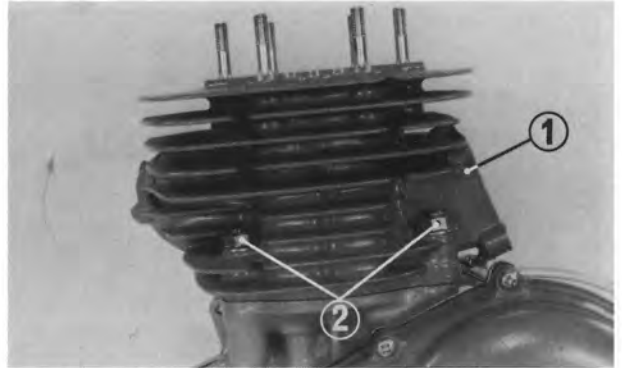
(1) Cylinder (2) Nuts (four)
